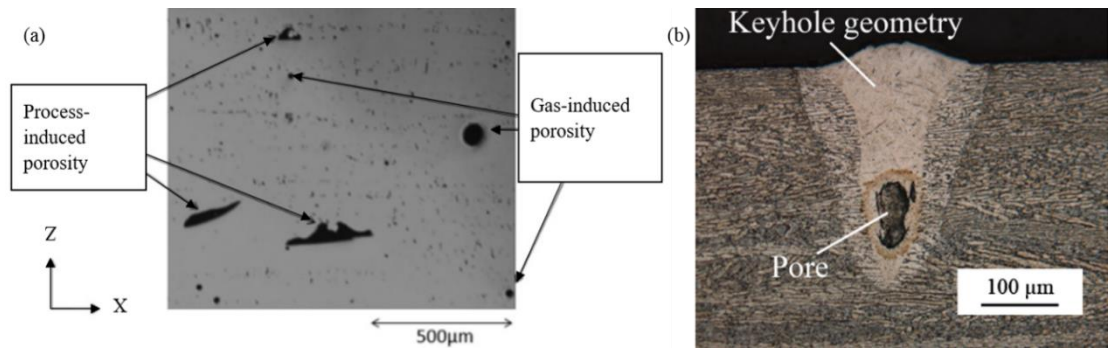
Examples of (a) Process- and gas-induced porosity [15] and (b) keyhole porosity [90]. Reproduced with permission of the rights holder.
